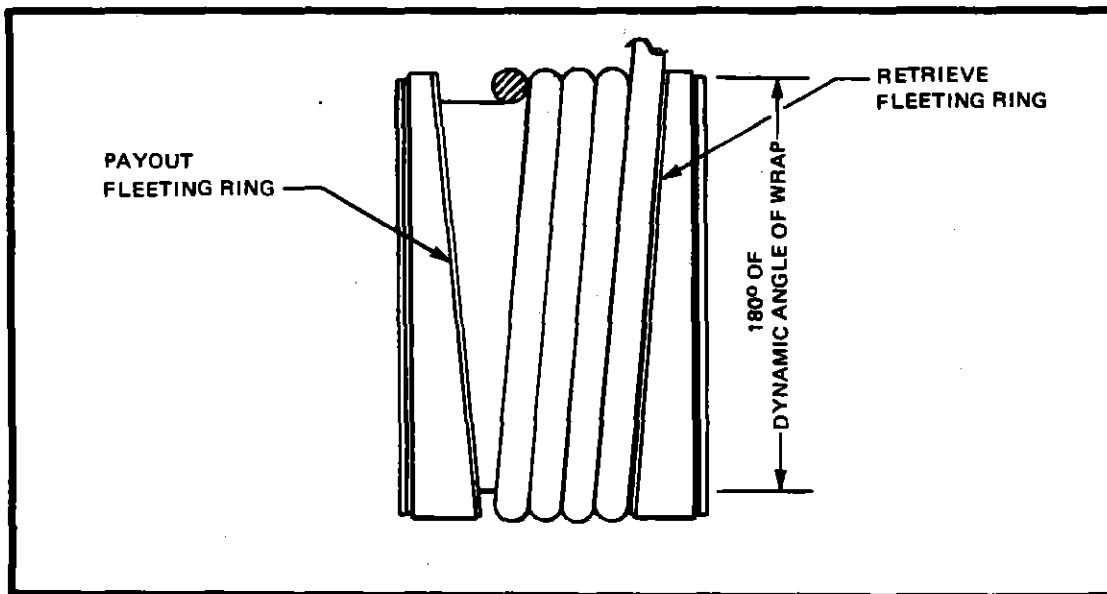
Arrangement of Fleeting Rings on Drum Tensioner
